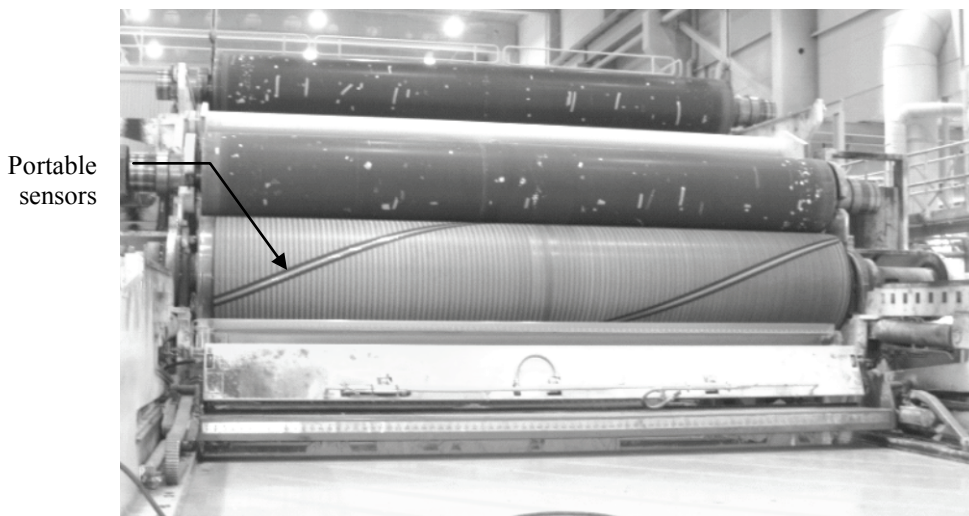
Portable intelligent roll system installed on the paper machine reel drum.
